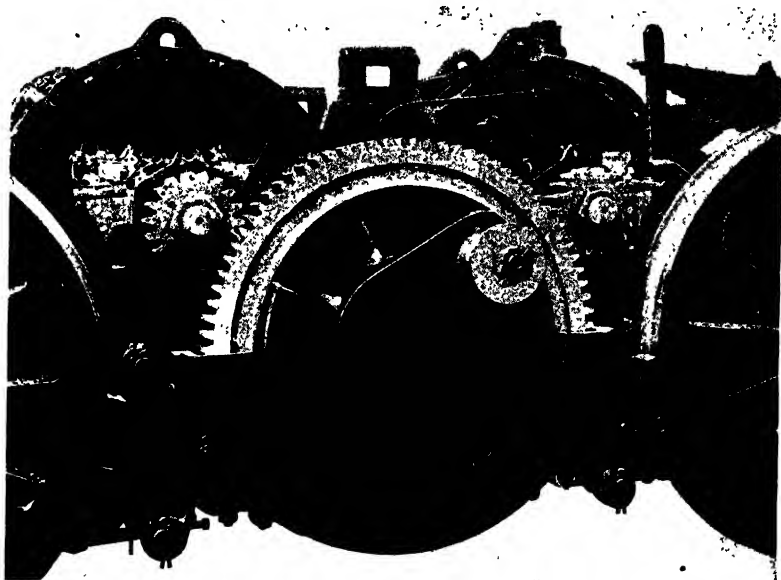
A.—Truck with Motors and Gear-driven Jack-shaft for Norfolk and Western Locomotive.
